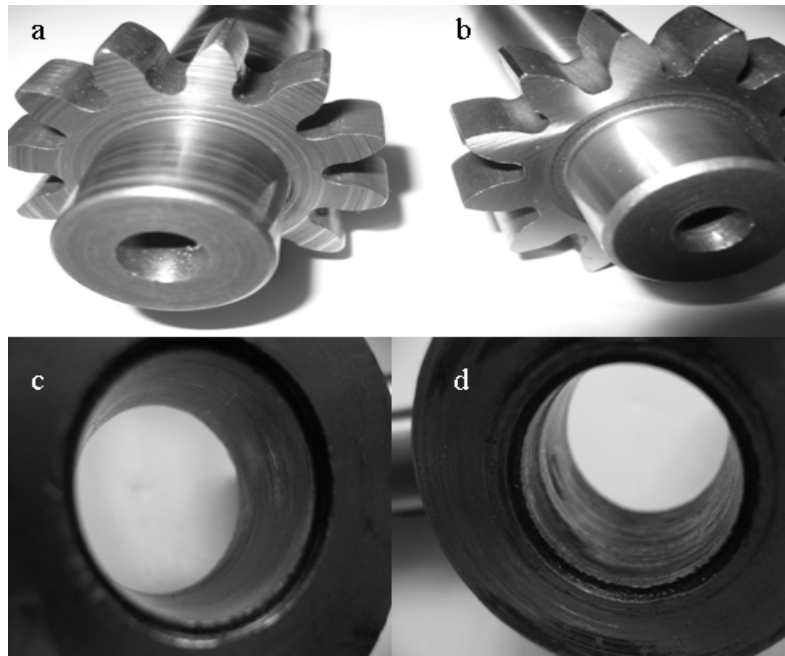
a. View of gear with tooth face wear, b. View of good gear, c. View of good journal-bearing, d. View of journal-bearing with inner face wear
